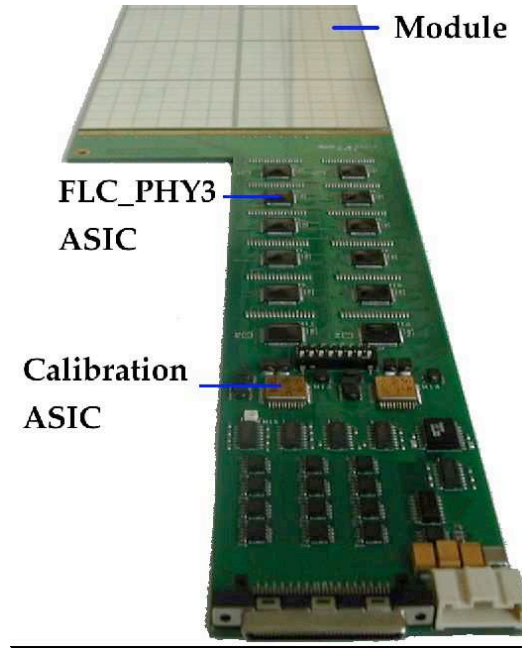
Picture of the very front end PCB, and description of its elements. PCB thickness: 2.1 mm, length: 600 mm, largest width: 12.4 mm.
